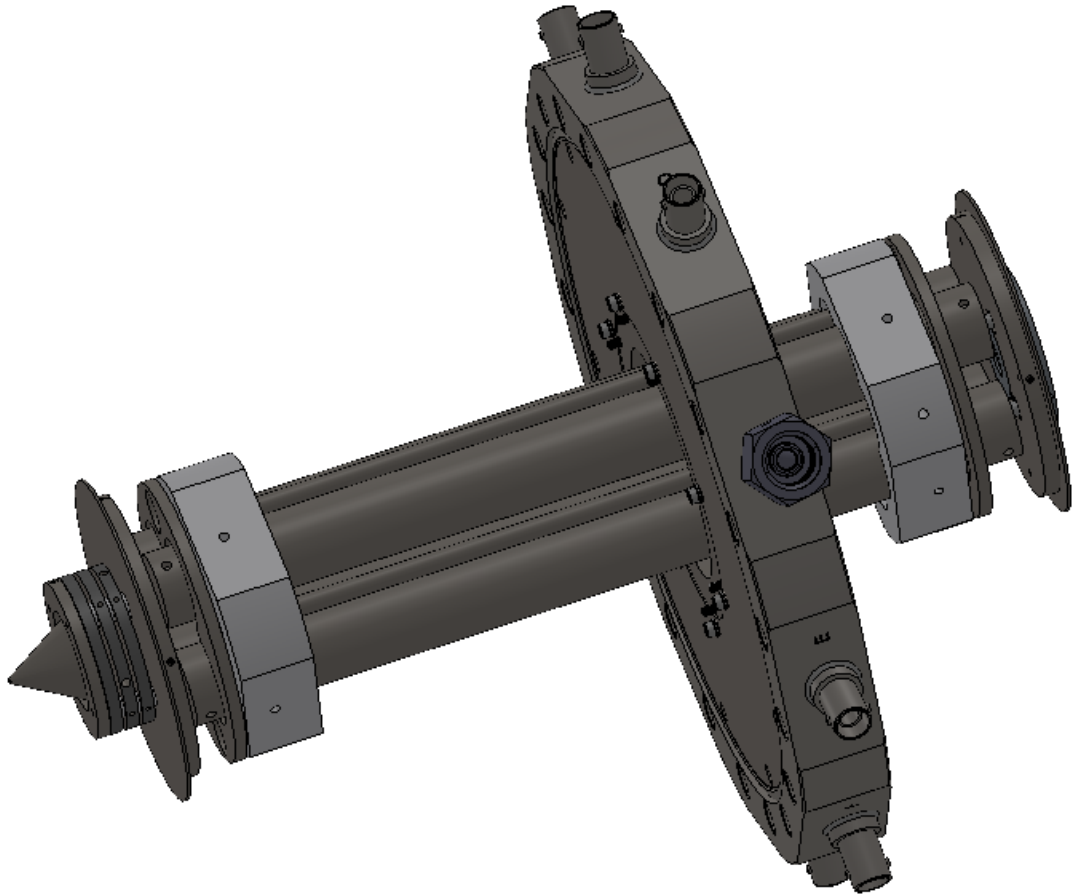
Side view of the QMF and radial flange, excluding the QMF housing. Drawn to scale. The four, mounted cylindrical rods of the QMF are shown.
